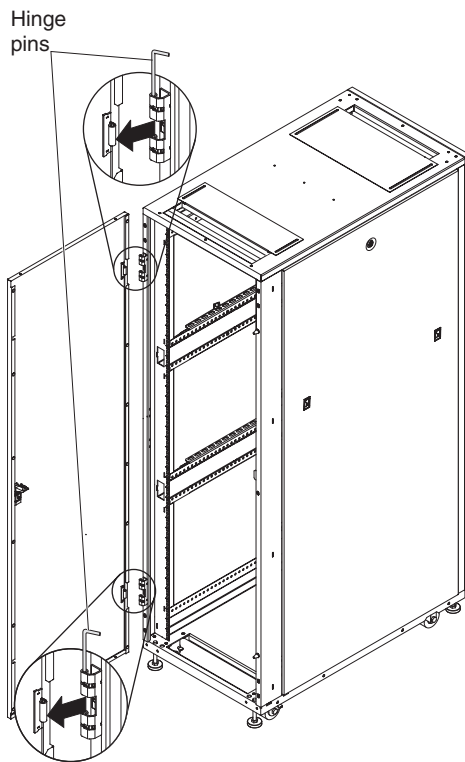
Removing the front door (9363-4PX and 9363-4EX only)
